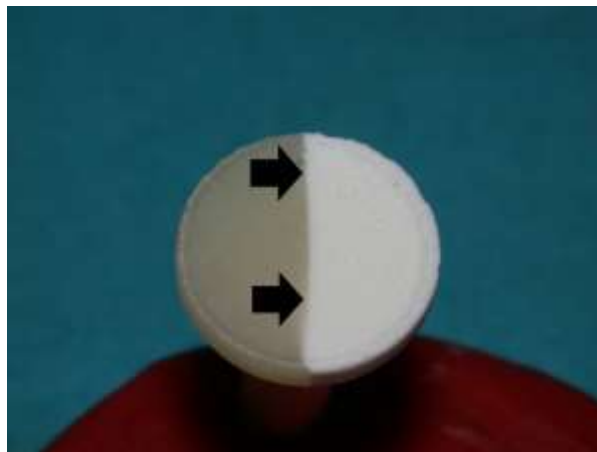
The casting button clearly showing the two roughs division (black arrows), maintained after casting
